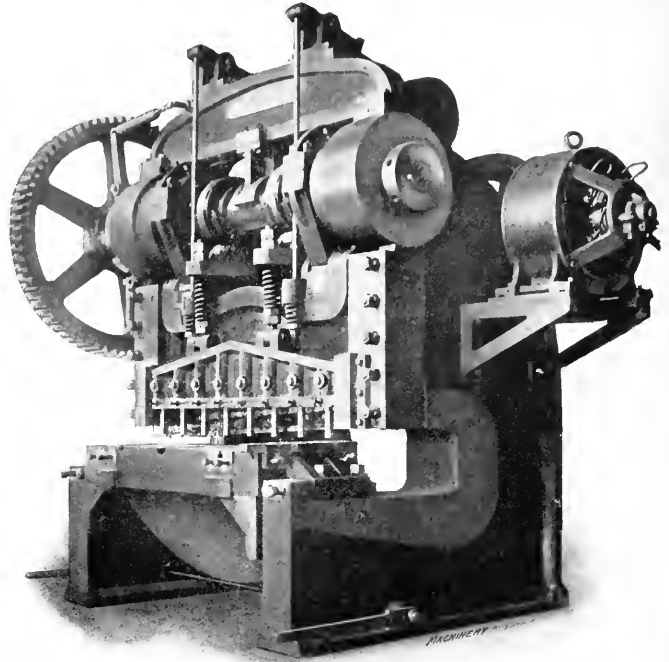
Right-hand Side of Bertsch Shear showing Application of Motor Drive
